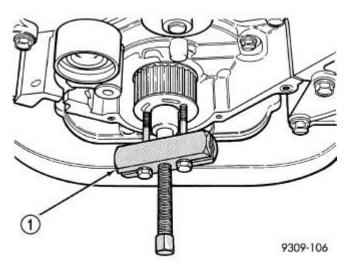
Crankshaft Sprocket - Removal Courtesy of CHRYSLER LLC
